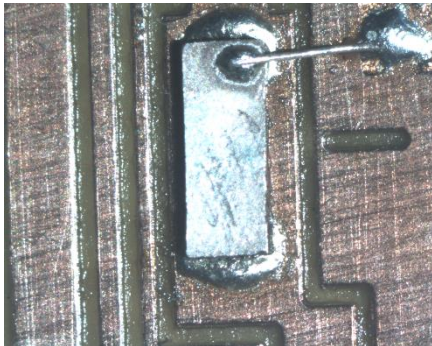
Test 4: Soldering using a newly purchased solder paste with the modified reflow program produced clean solders with minimal variation.
